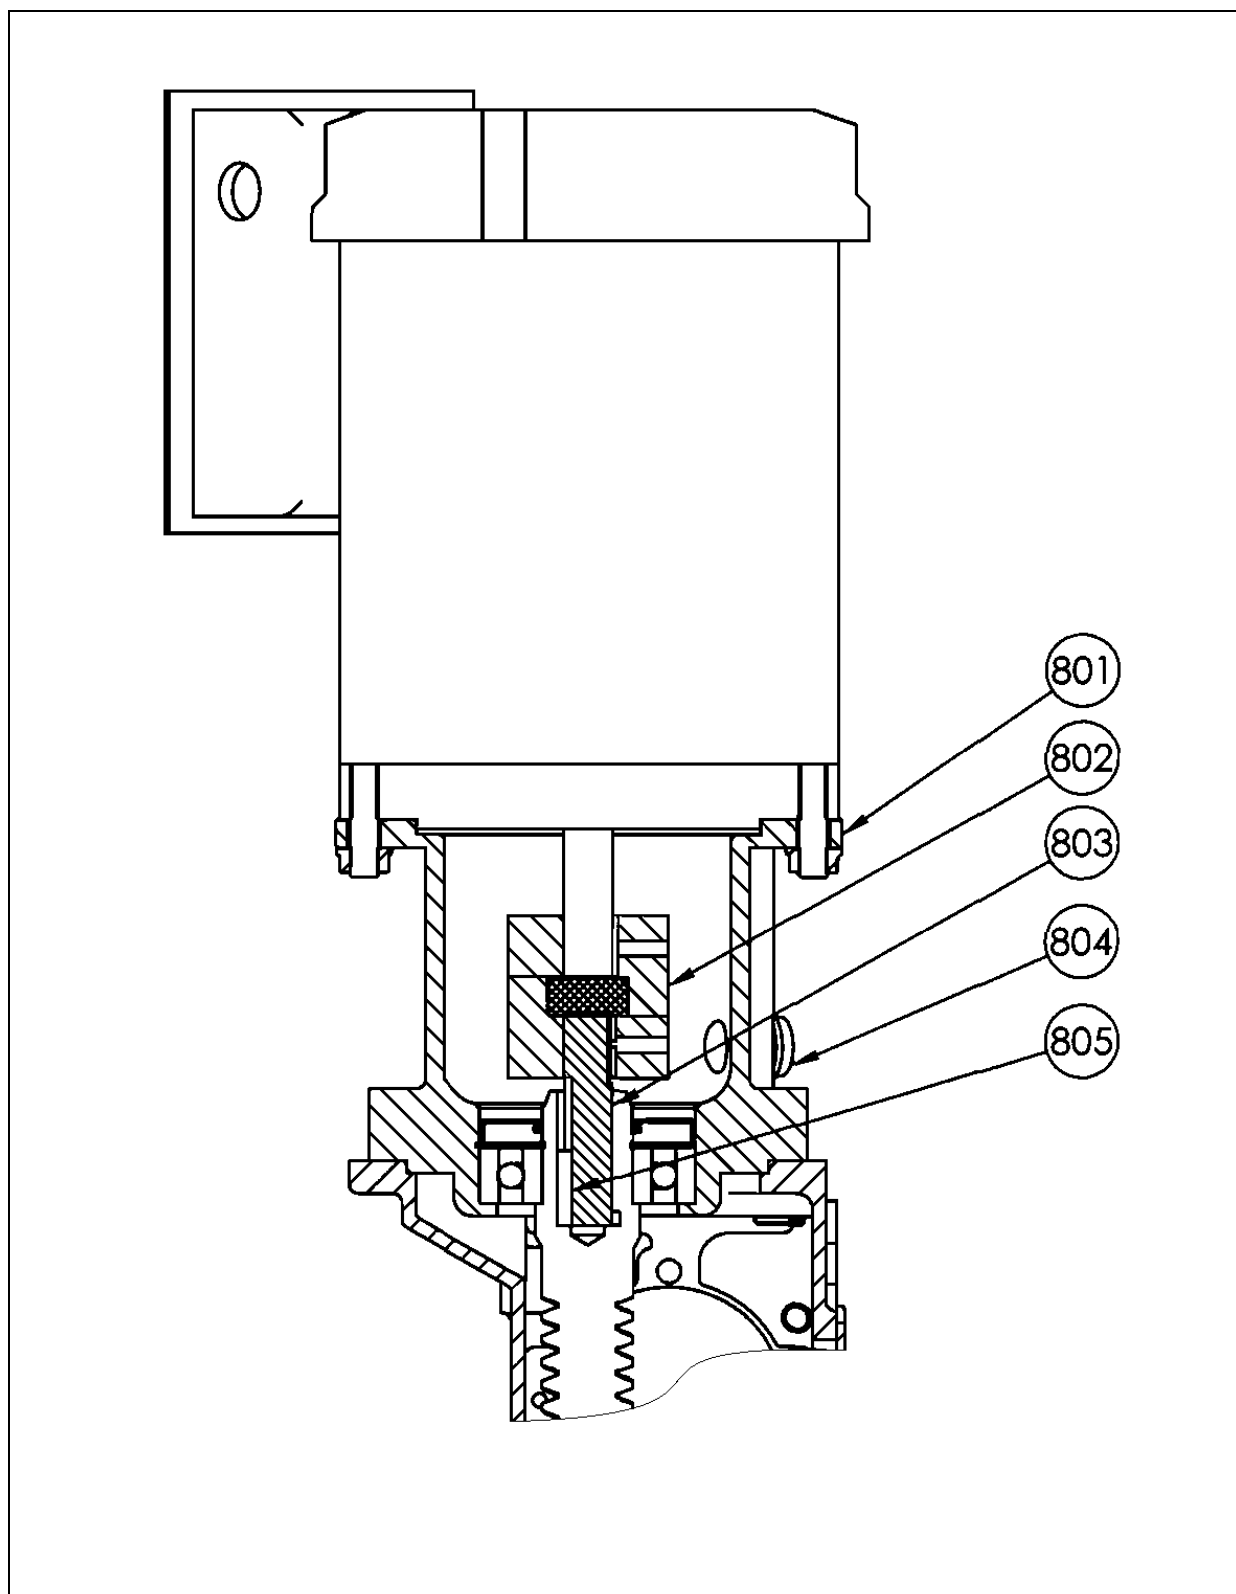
Motor Adapter Assembly (Flexible Coupling Mount).
